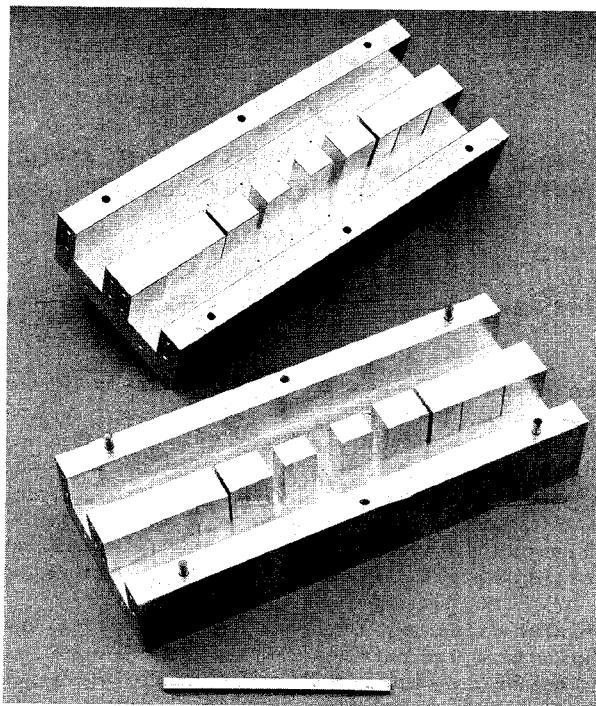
Exploded view of S-band 6-db branch-guide coupler.
